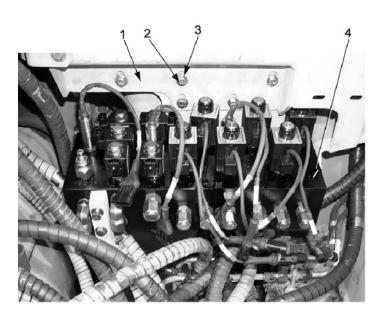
Mounting and Installation of HDC Primary Manifold Assembly
